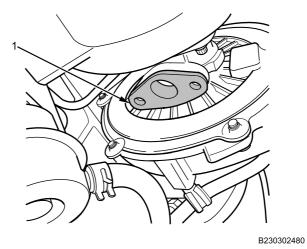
Turbocharger Lubricant Drain Tube Flange Gasket.
